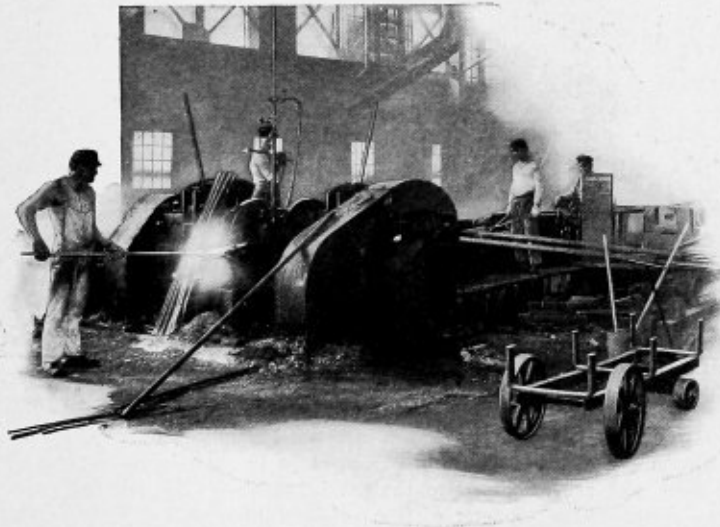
HEATED BILLET ENTERING PIERCING MILL.
